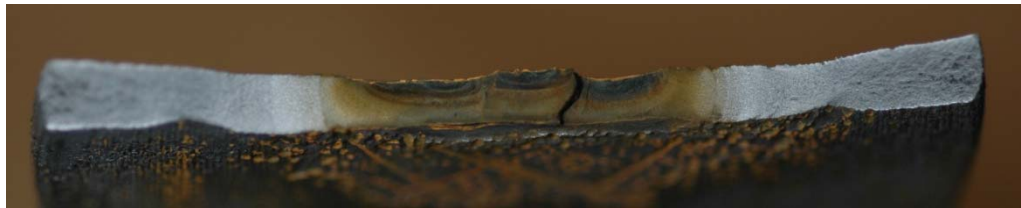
Fracture Surface of Specimen 5-3 ‘3.5 Day’ at ‘Failure’
